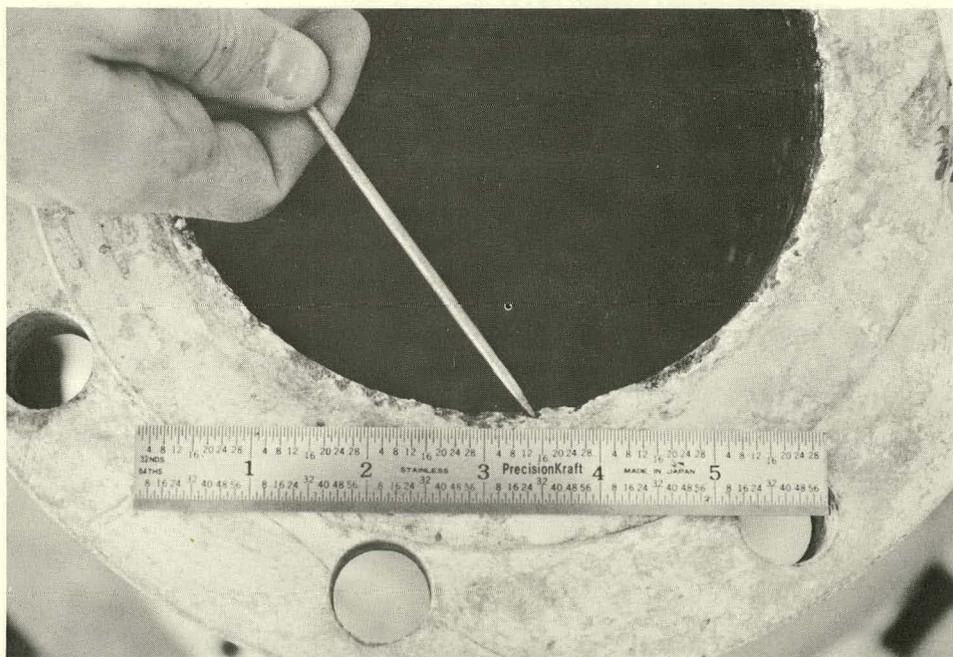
Close-up Appearance of Inlet Flange on Heat-removal Condenser Water Box. Depth of attack approximately 6 mm.
